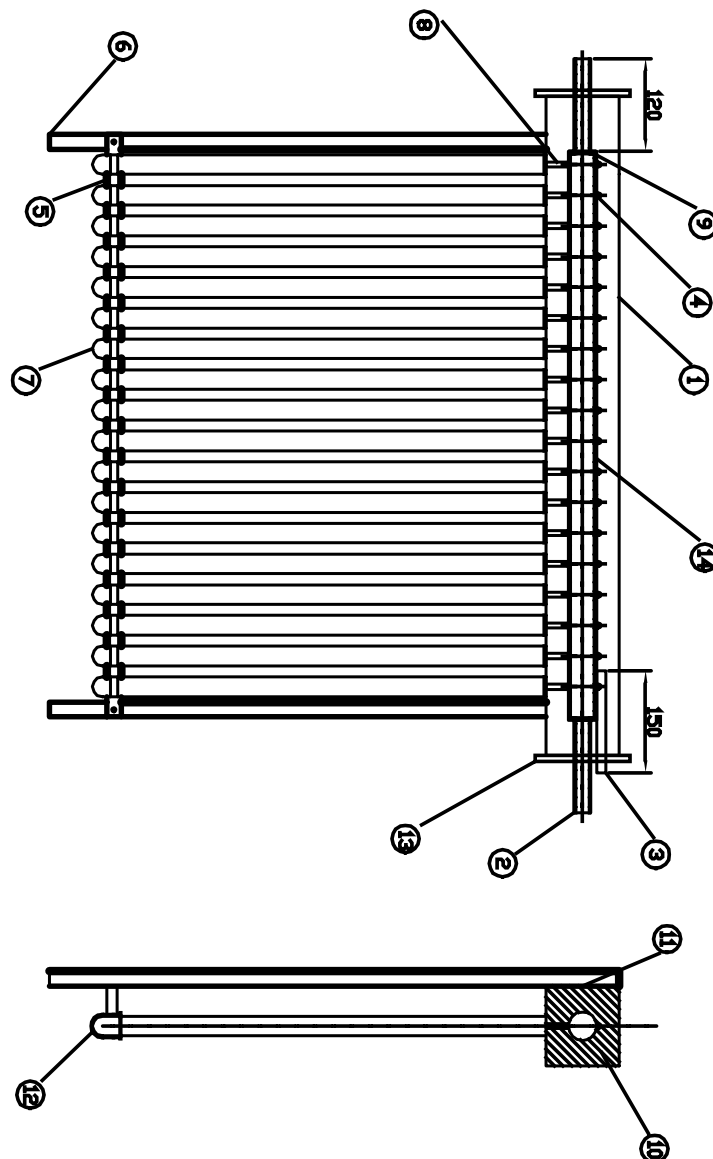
Drawing of absorber layout SPA-58-1800-18-C
